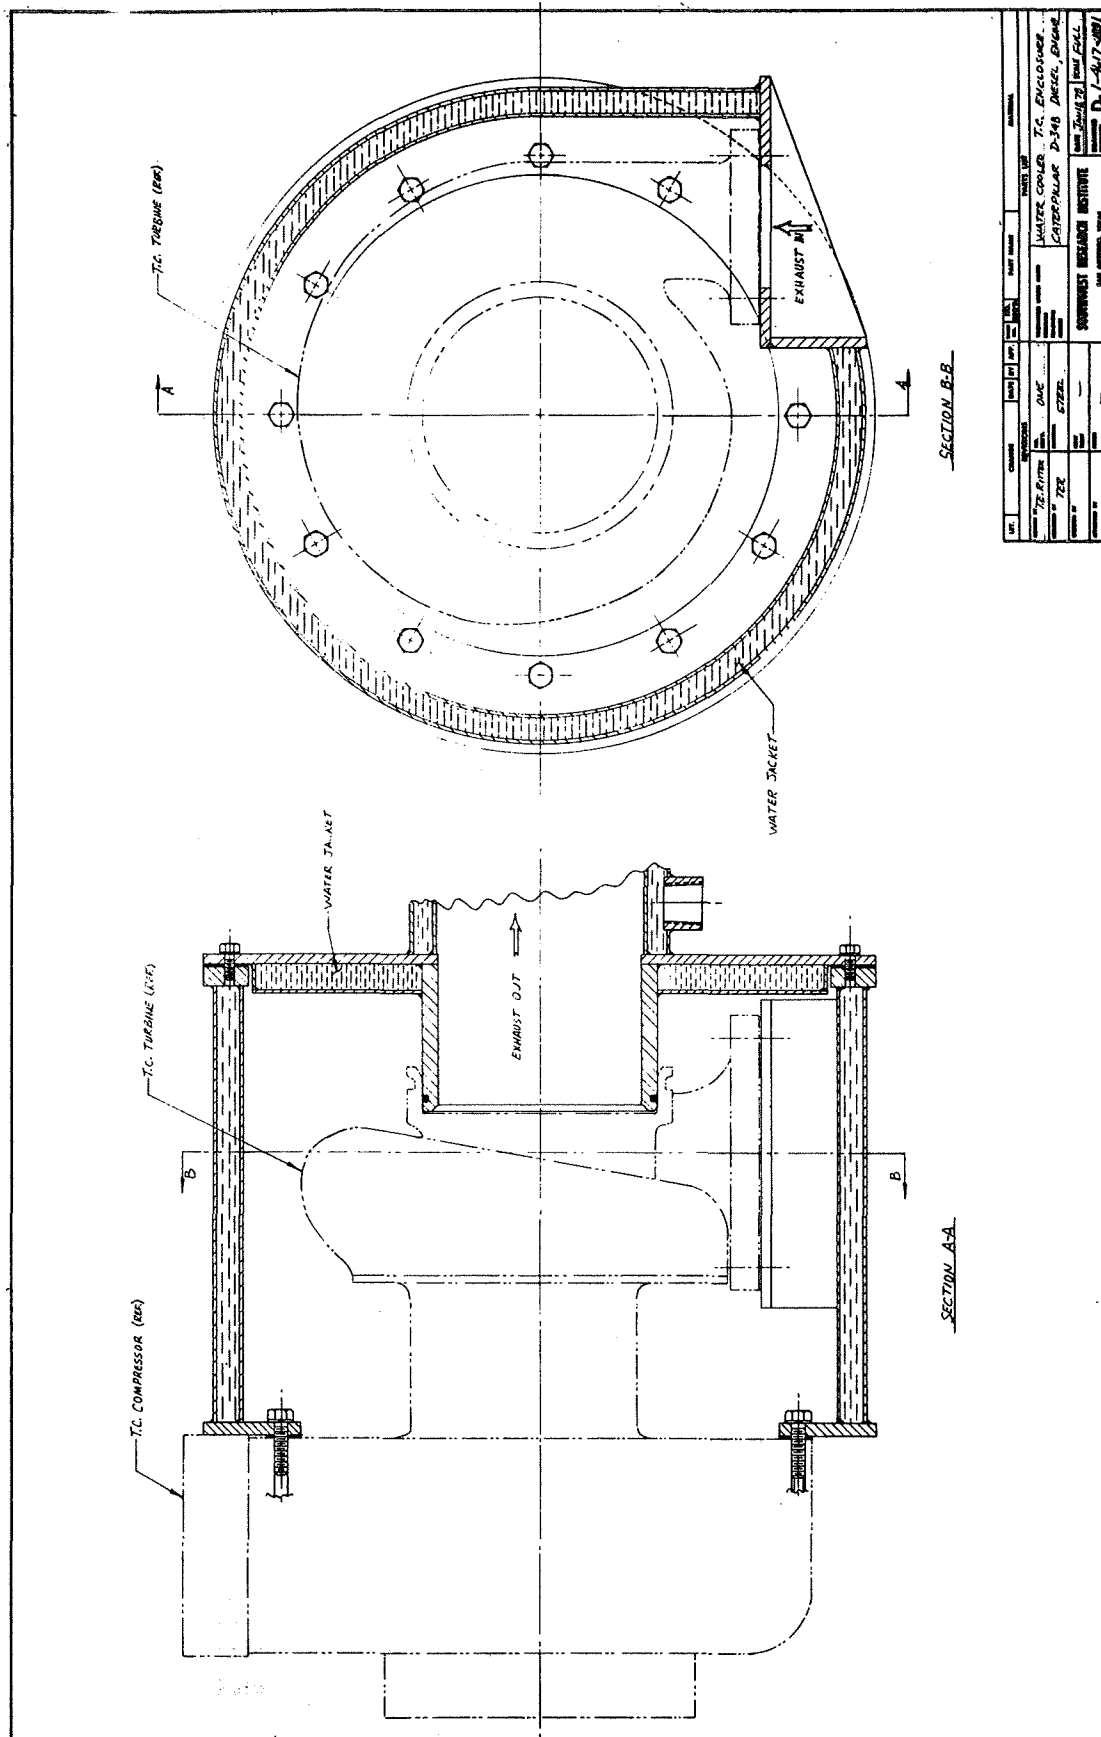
SECTIONAL VIEWS OF WATER JACKETED ENCLOSURES
